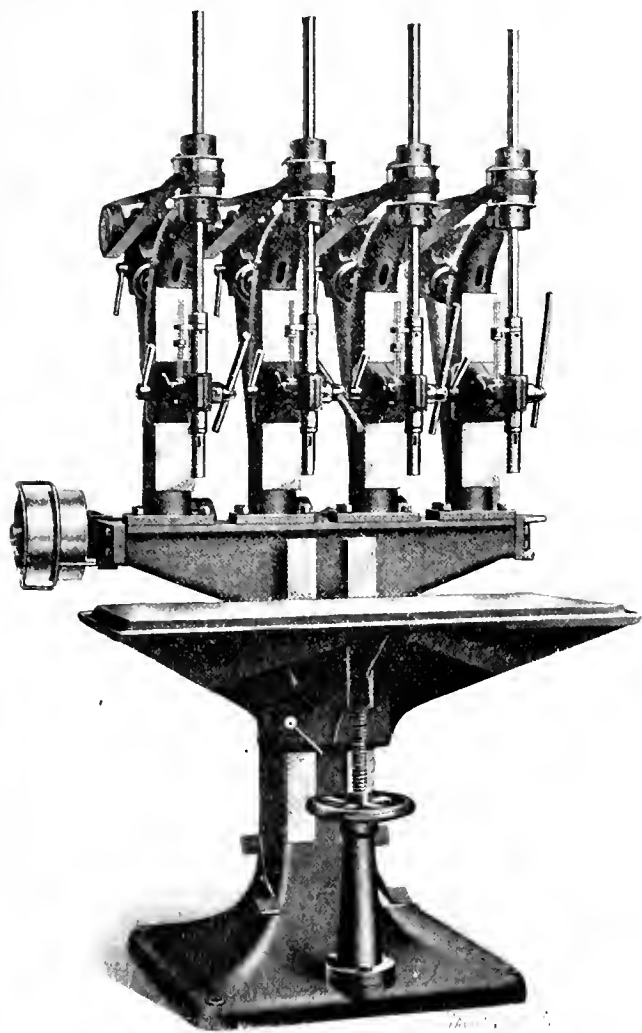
Sensitive Four-spindle Drill, built by W. H. Leland & Co., Worcester, Mass.
